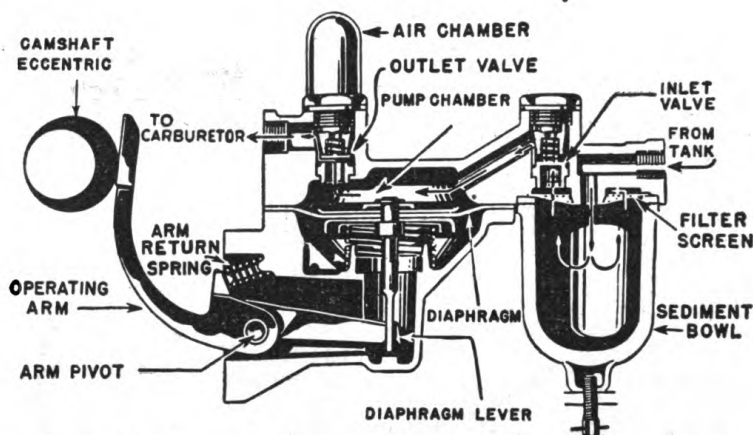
Mechanical fuel pump with a separate fuel filter built integrally with the pump.
